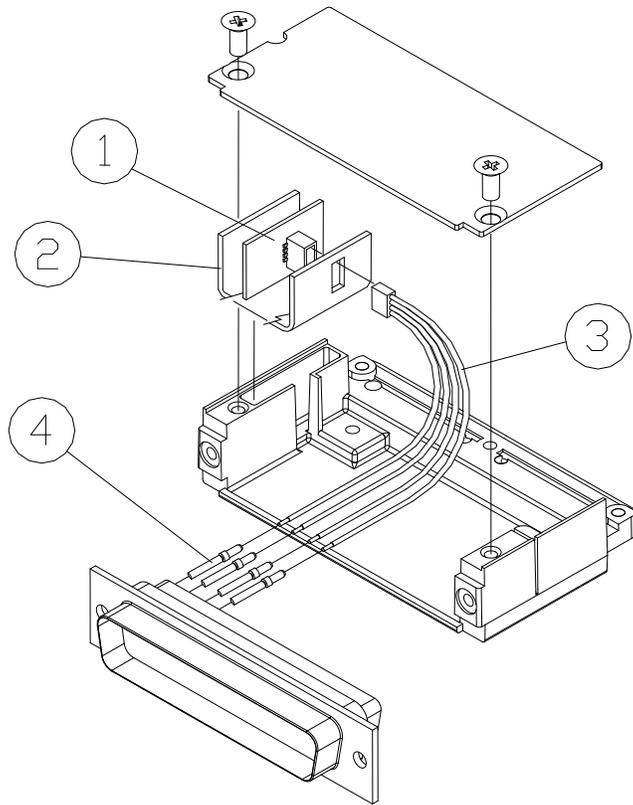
Backshell Assembly (Configuration Module with Spacer)
